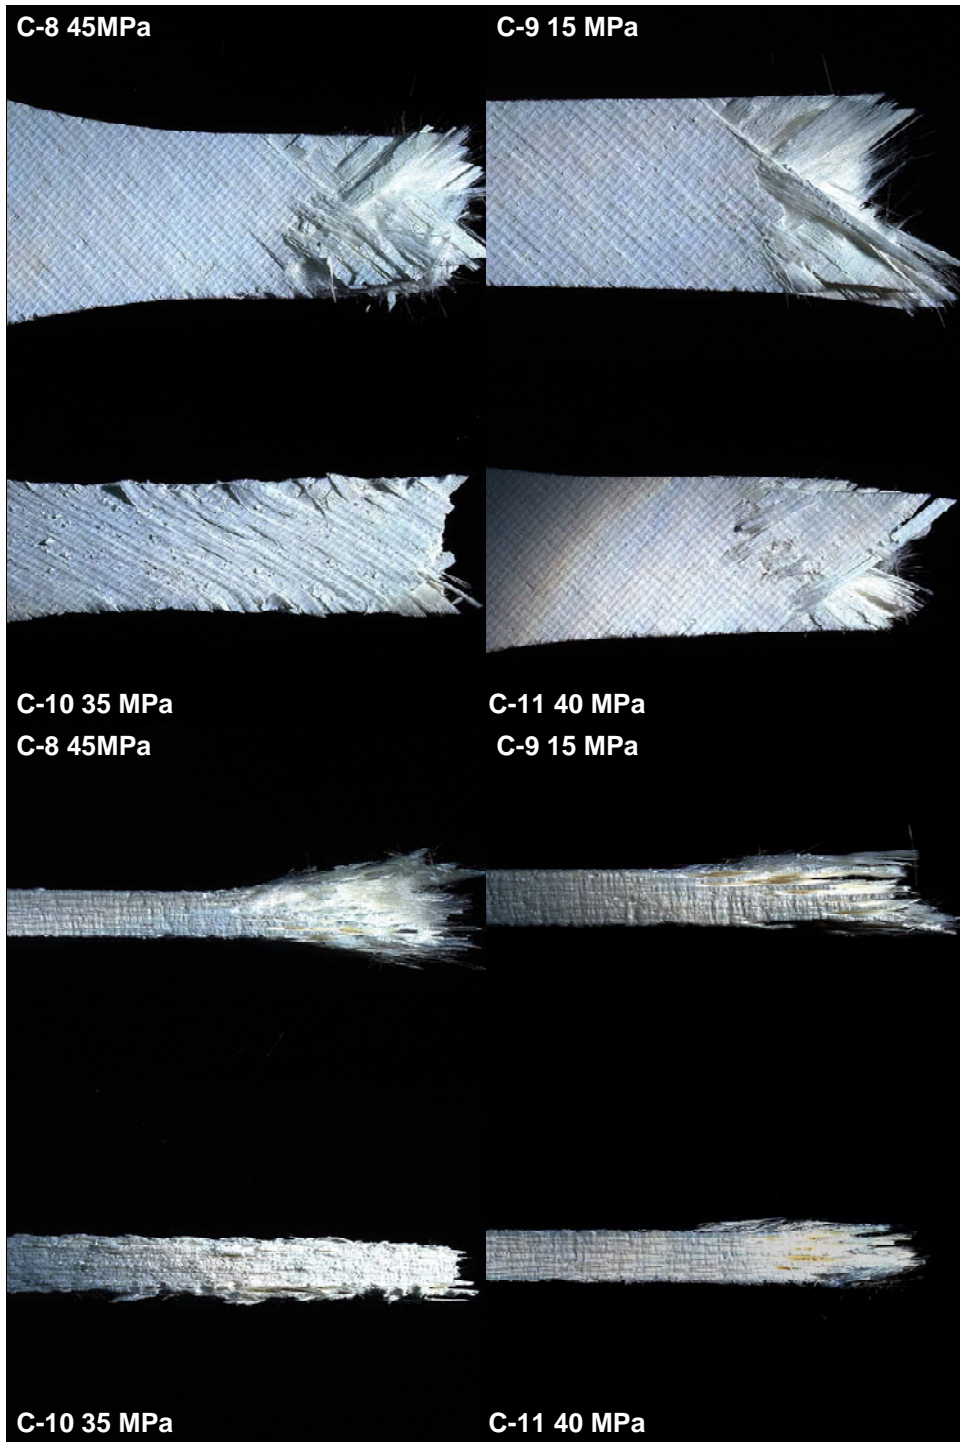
Fracture surfaces of Nextel™720/alumina CMC specimens tested in creep at 1200°C in 100% steam environment.
